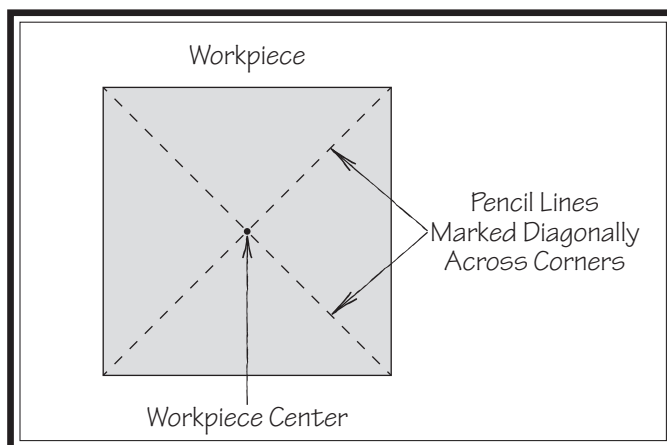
Workpiece marked diagonally from corner to corner to determine center.
